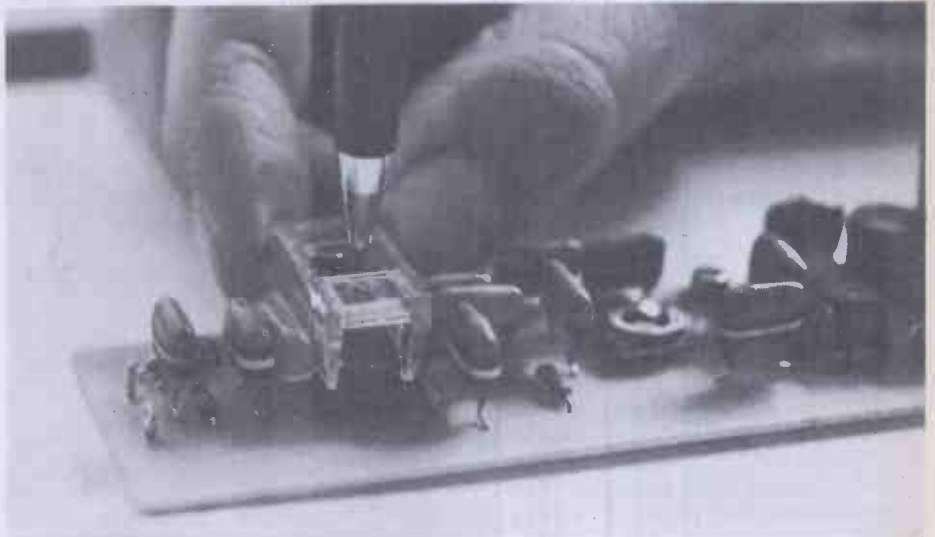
Using a plastic packaging holder as a hybrid insertion tool.
